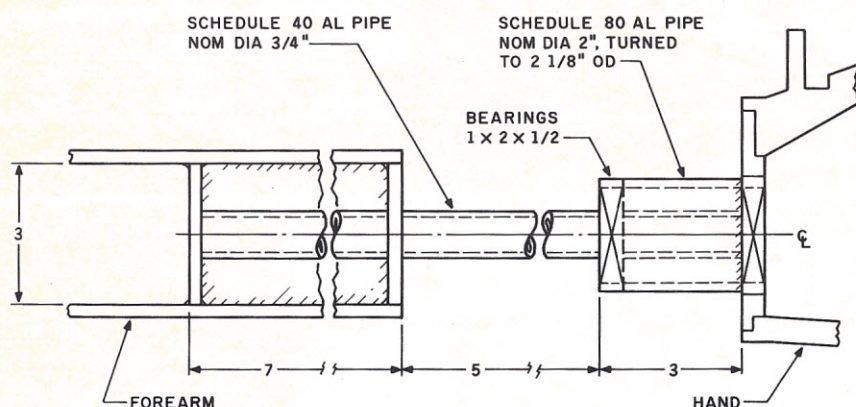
Another view of the wrist joint, showing the two pipes and the two bearings. The small pipe guides the cables and is welded to the forearm at two points.
